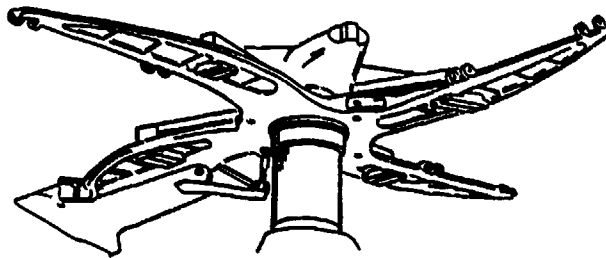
ROTOR HEAD OF LOCKHEED CHEYENNE
